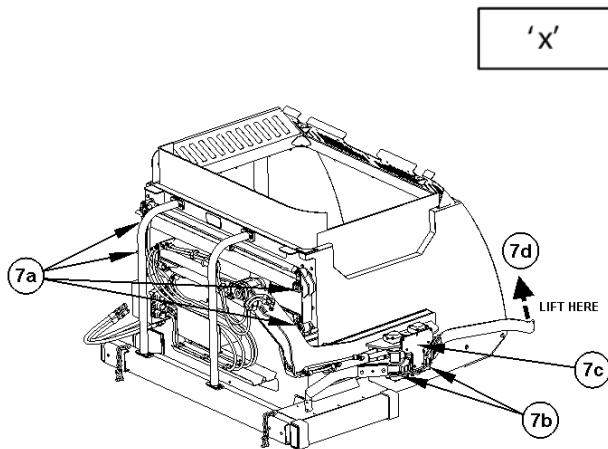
Mechanical on Curotto-Can Assemblies Weekly Check
